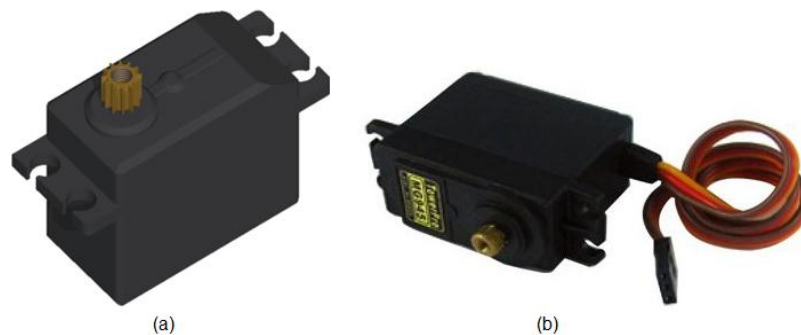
Servo motor: (a) Autodesk Inventor picture and (b) MG945 servo motor
